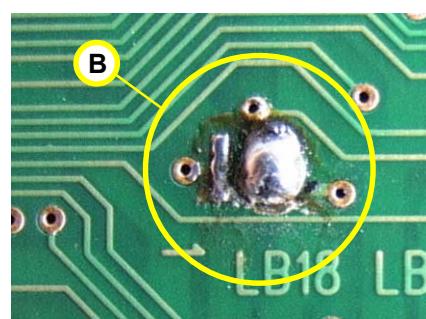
Soldering pad "LB18" (PCB "DSP01")
